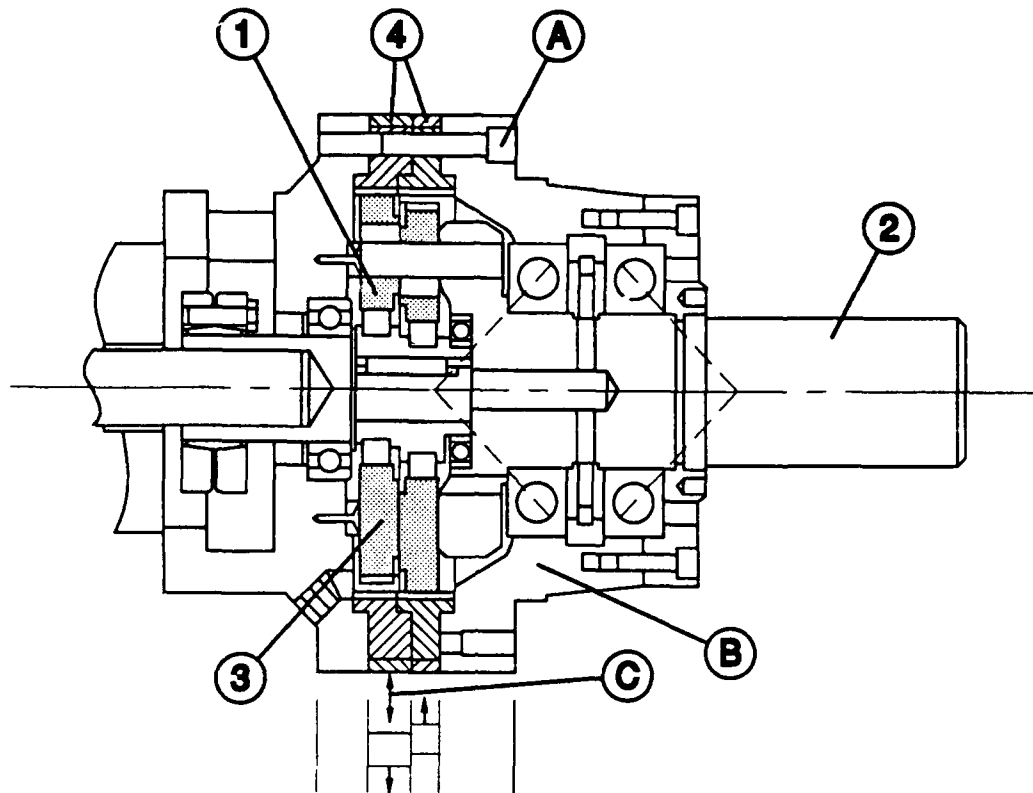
Cross-sectional view of CORBAC reducer, showing (1) output shaft-assembly cantilevers, (2) output shaft, (3) two eccentrically located crown-gears, (4) split inner gear rings for indexing and backlash reduction and preloading, (A) set screws to hold index pattern, (B) output housing, (C) indication of inner ring gear indexing displacement.
